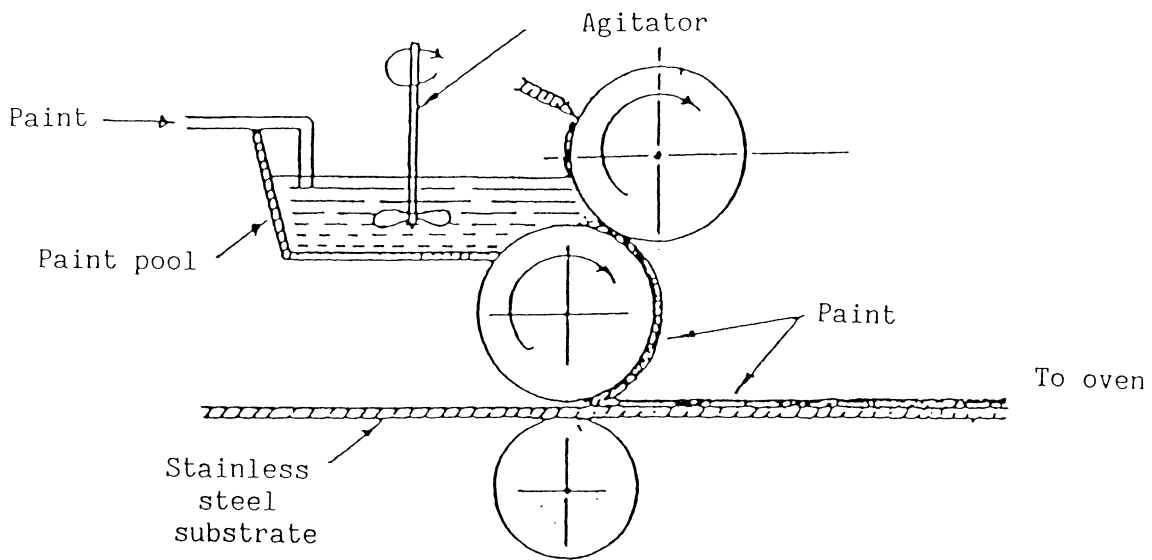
Improved Painting Line Coating System for Weldable RCSS
